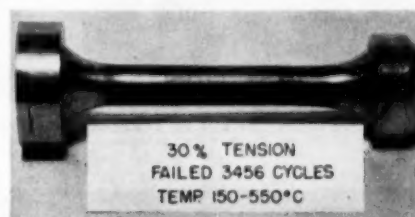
FATIGUE CRACK IN TEST SPECIMEN WITH 30 PER CENT TENSILE PRESTRAIN
